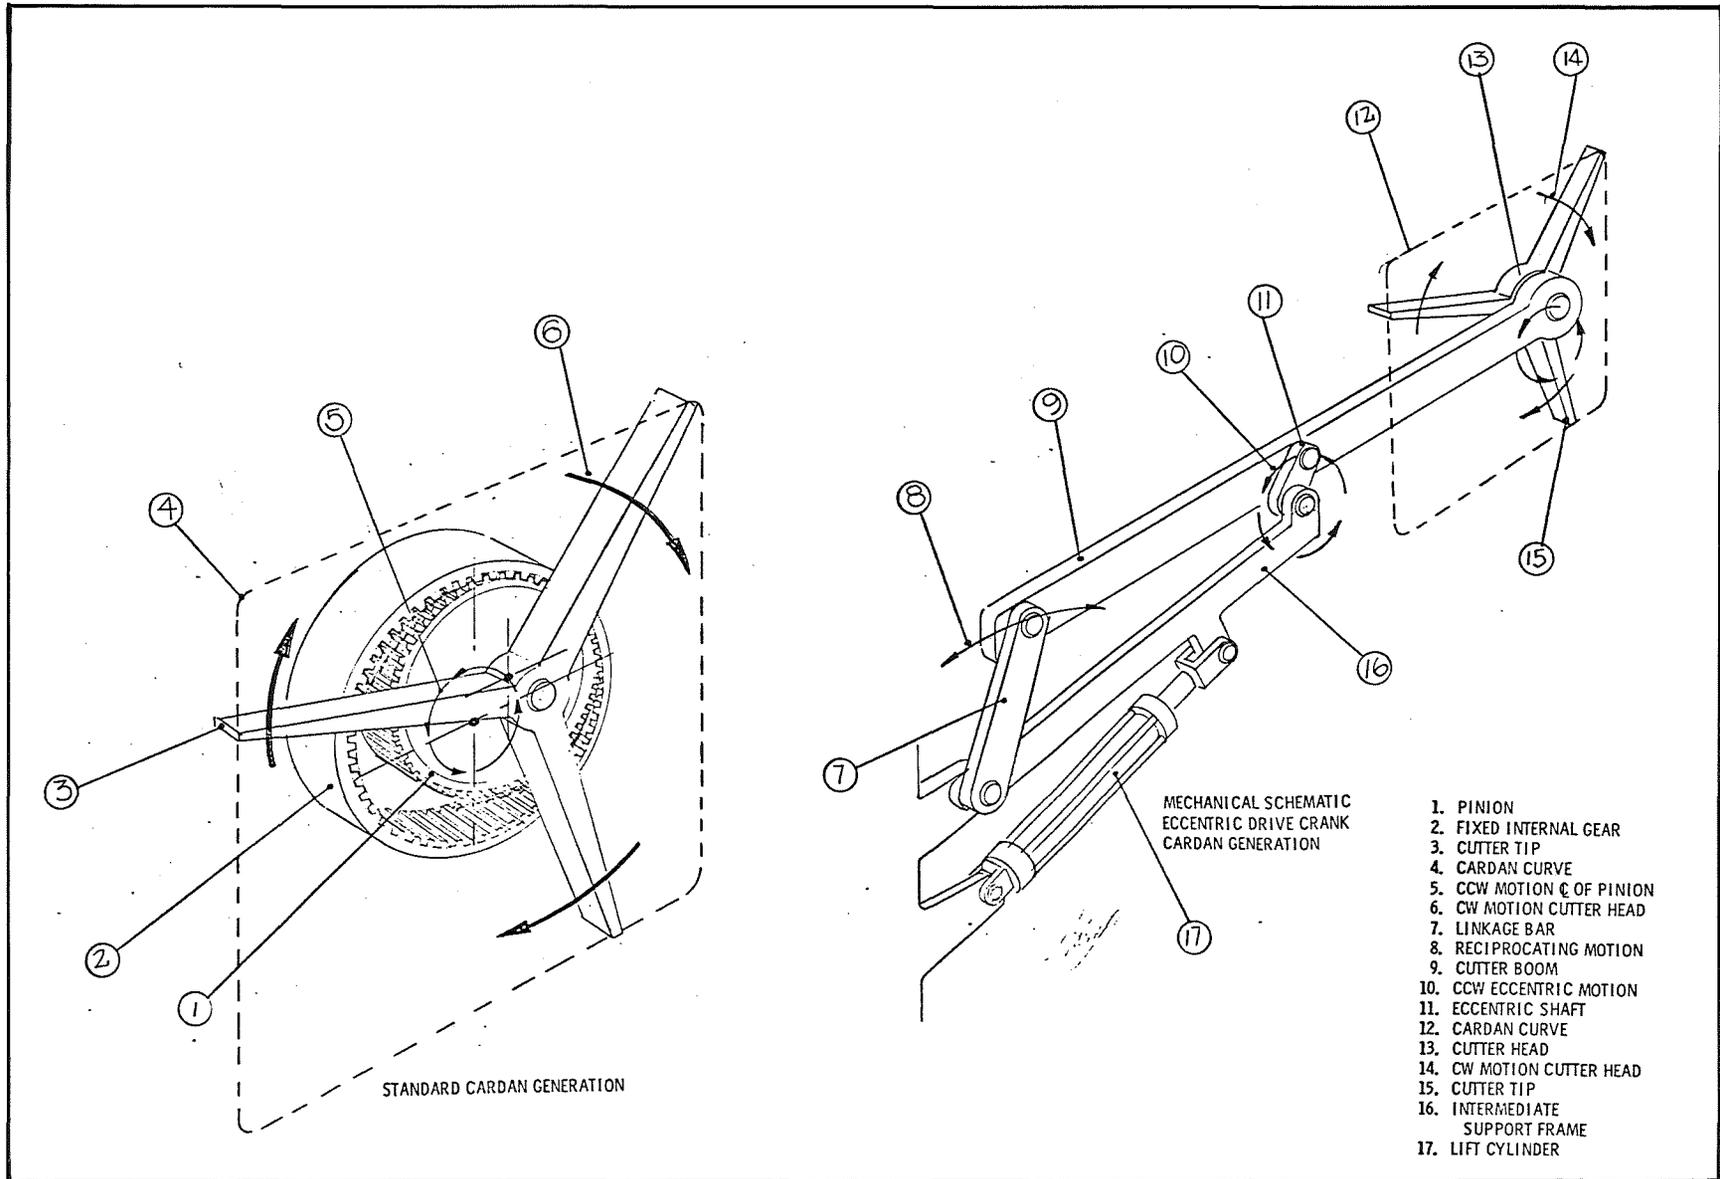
CARDAN GENERATOR AND ECCENTRIC DRIVE CRANK
